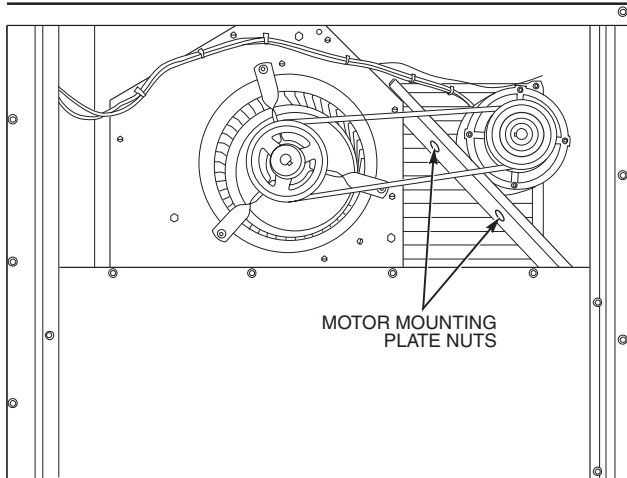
Belt Drive Motor Mounting, 50TFF007-009
